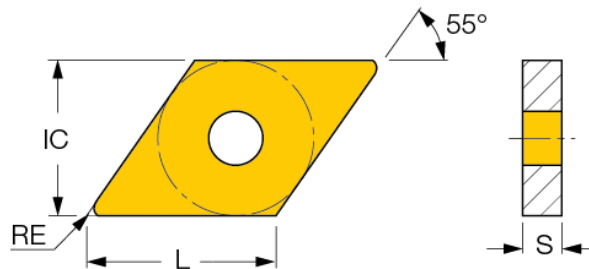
Schematic diagram of the cutting tool DNMG (Source: Hochleistungs-Zerspanungswerkzeuge et al., 2020).
